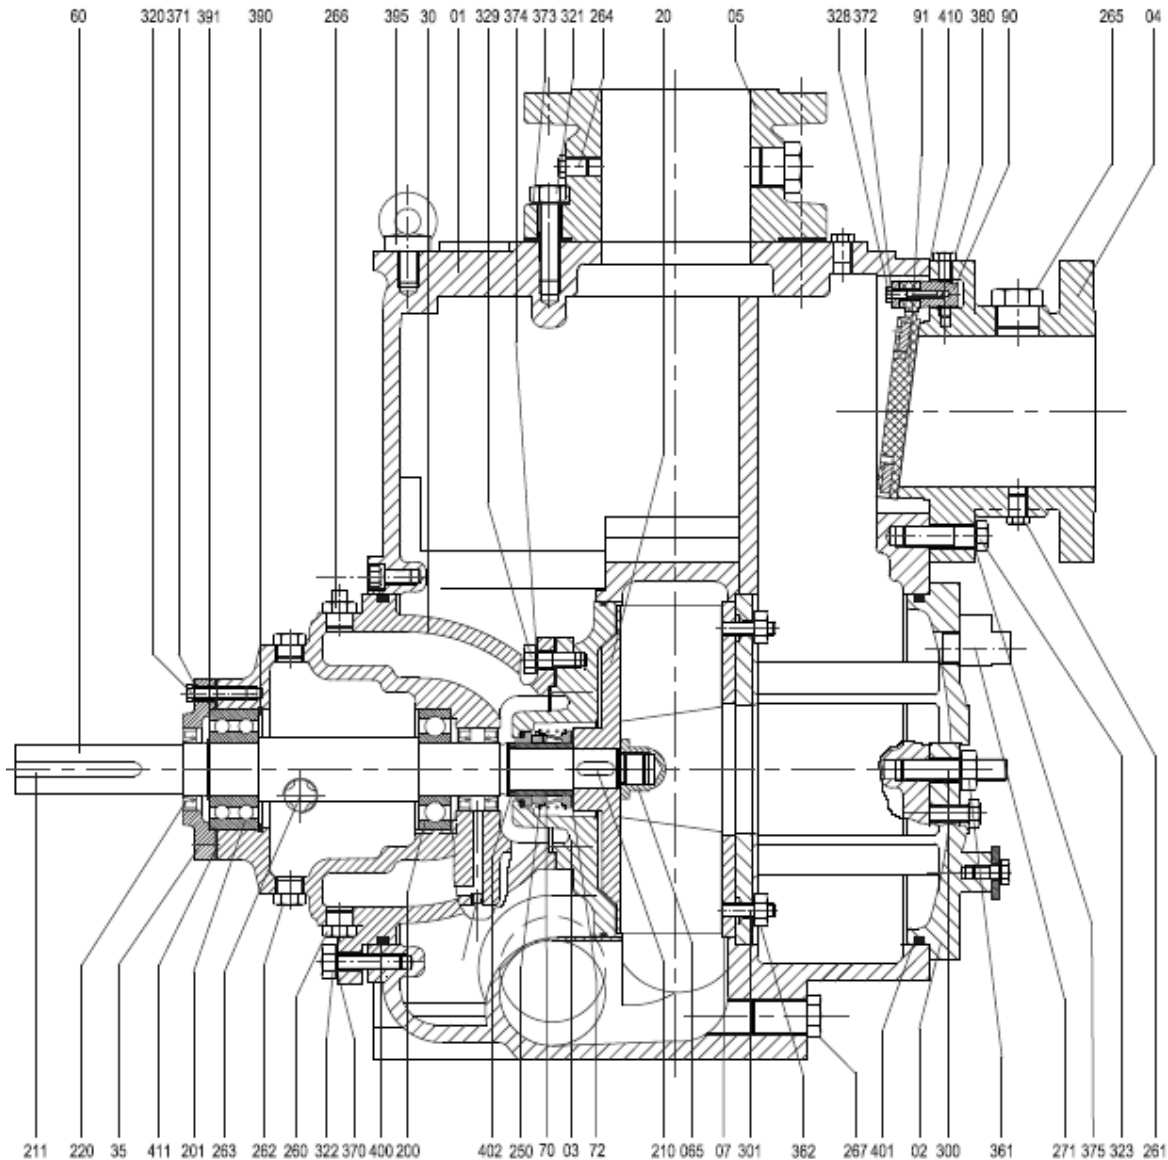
UKM-S Sectional Drawing (2"x2" - 3"x3" - 4"x4" - 6"x6" - 8"x8")
